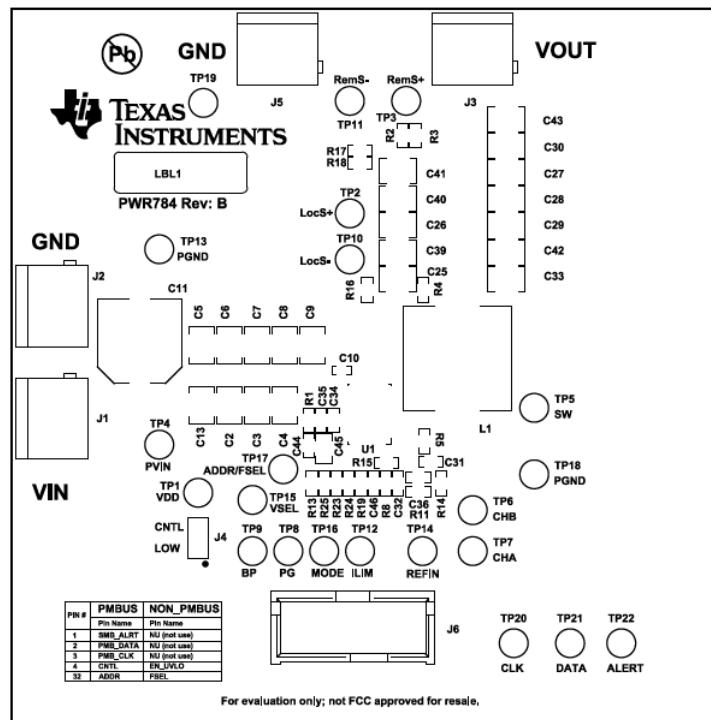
PWR-784EVM Top Layer Assembly Drawing (Top View)
